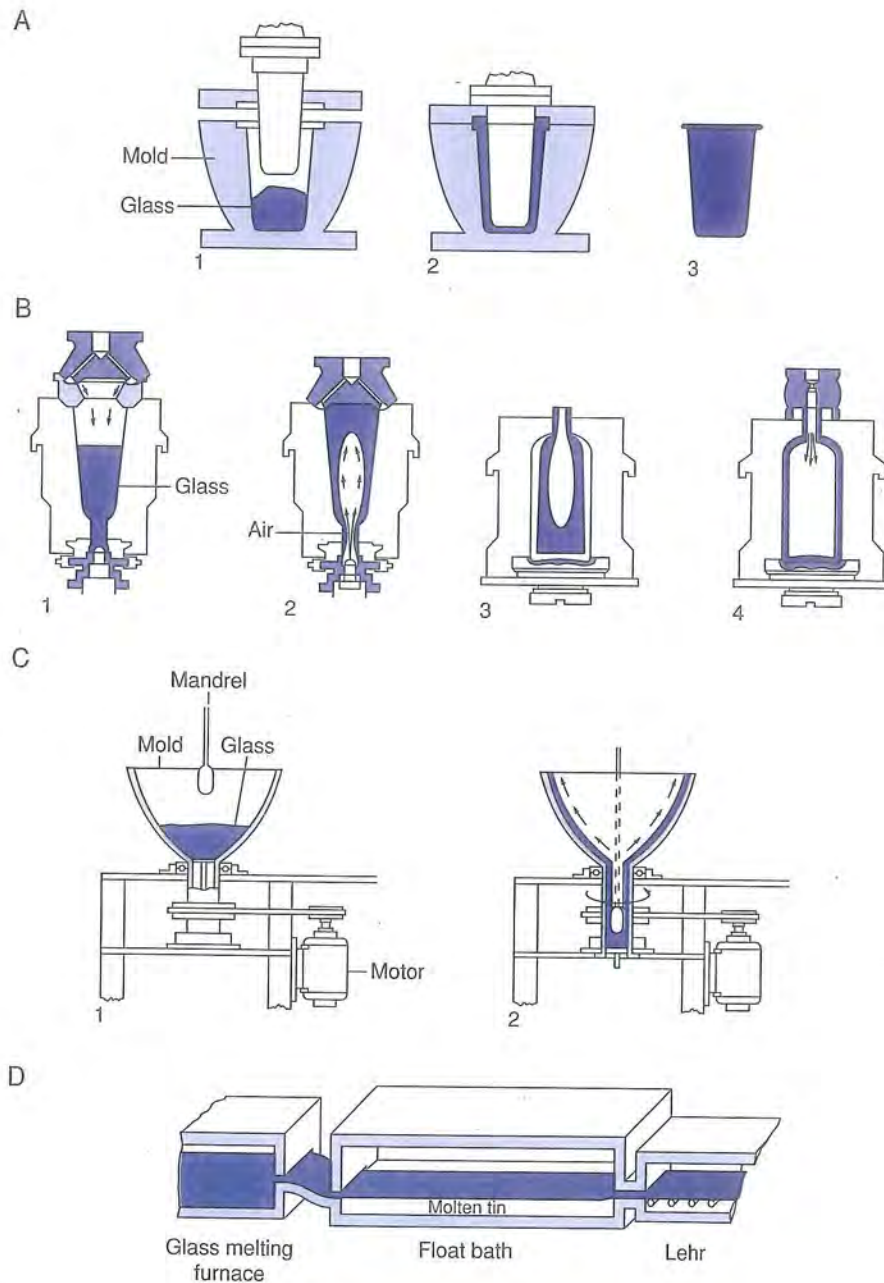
Processes to form and shape glass: (A) Pressing a glass container. (B) Blowing a bottle. (C) Centrifugal casting of a cathode-ray tube. (D) Plate glass manufacture by the Pilkington method. From J. R. Hutchins and R. V. Harrington, *Encyclopedia of Chemical Technology*, 2nd ed., Vol. 10, Wiley, New York (1966).
